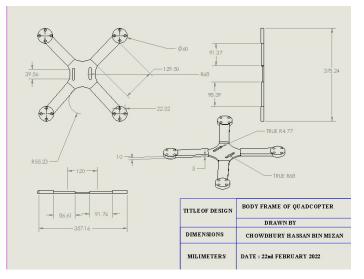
Sheet Diagram of the frame with necessary views and dimensions
